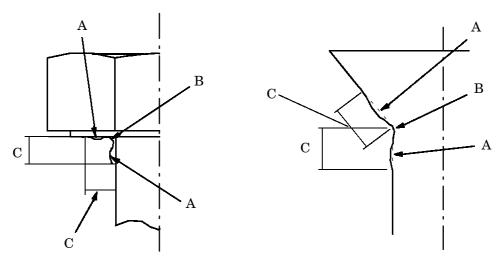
Tolerance of head-to-shank fillet profile
